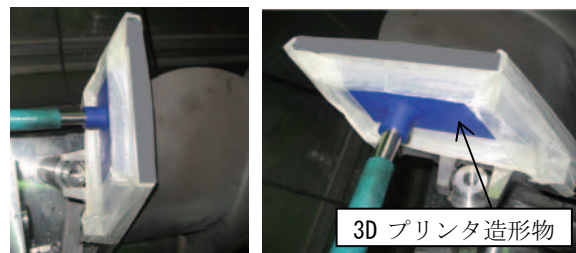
Water receiving jig for electrical discharge machining of turbine vanes
